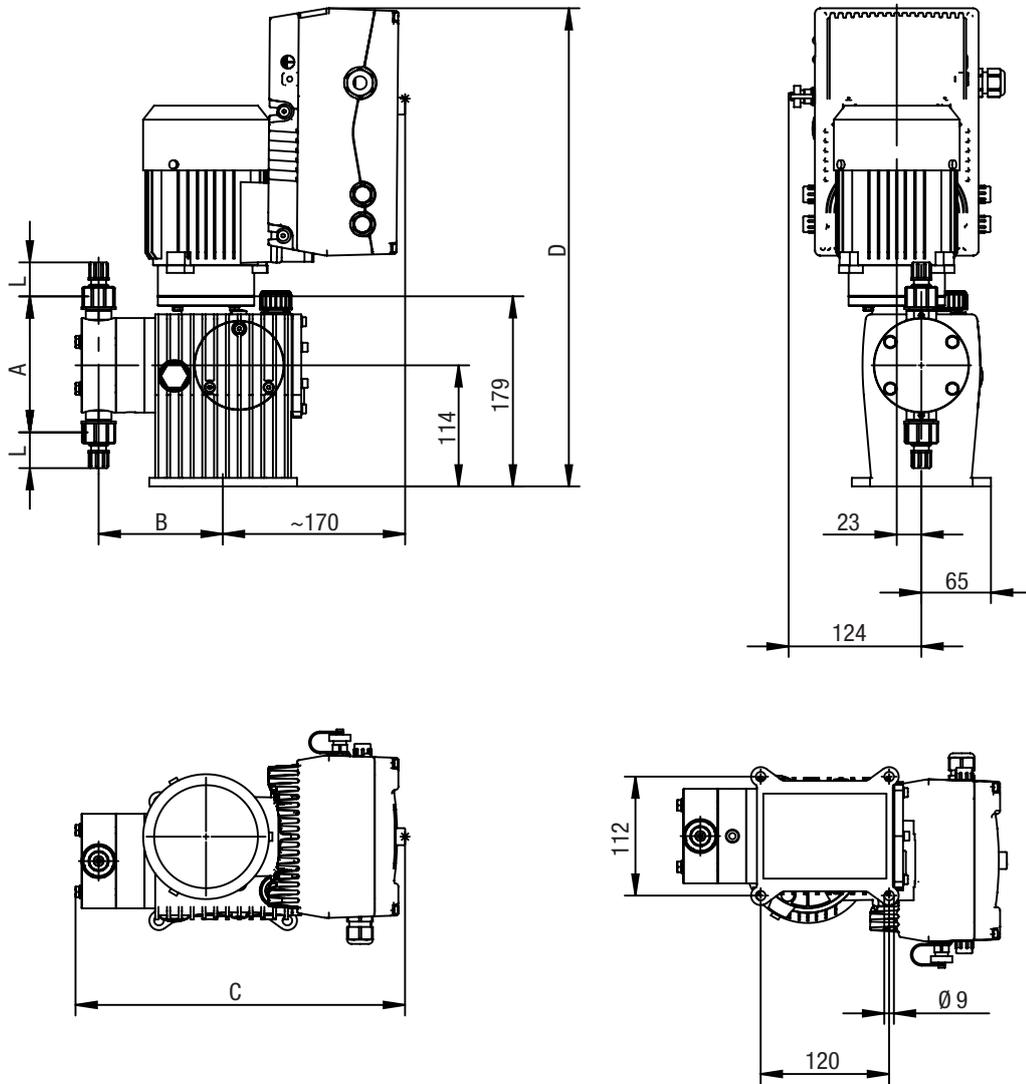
Dimensioned drawing MEMDOS LA 4 – 80, 150
